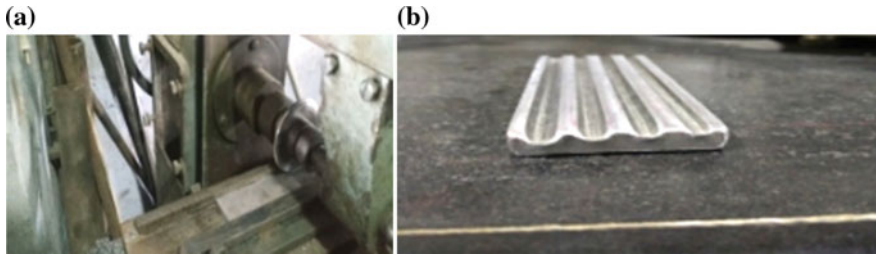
a Deep rolling set-up on a milling machine (*Courtesy* Thapar University, Patiala) and b Deep cold-rolled aluminium specimen
